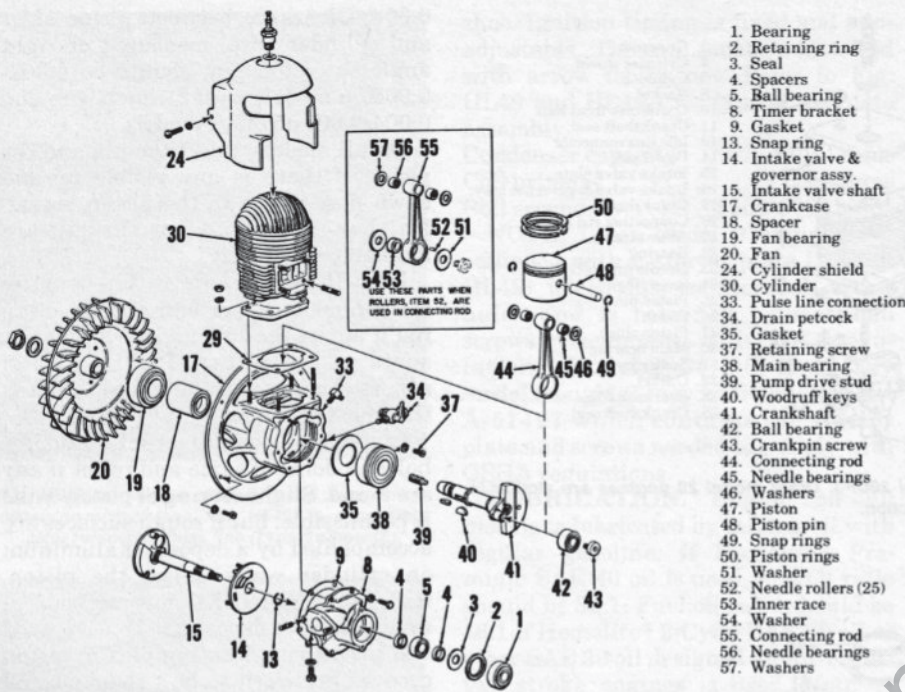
Exploded view of engine used on 8S3 series pumps. Some engines are equipped with needle roller crankpin bearings (see inset) while others have a double-row ball bearing (42) in crankpin end of connecting rod.
